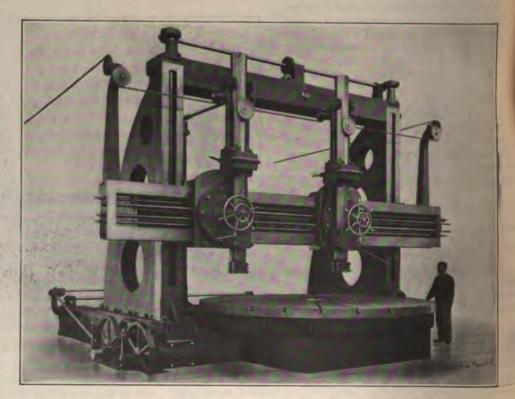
Extension Boring Mill, 16 by 24 Feet, Driven by a 15 H. P. Two-phase Motor.
